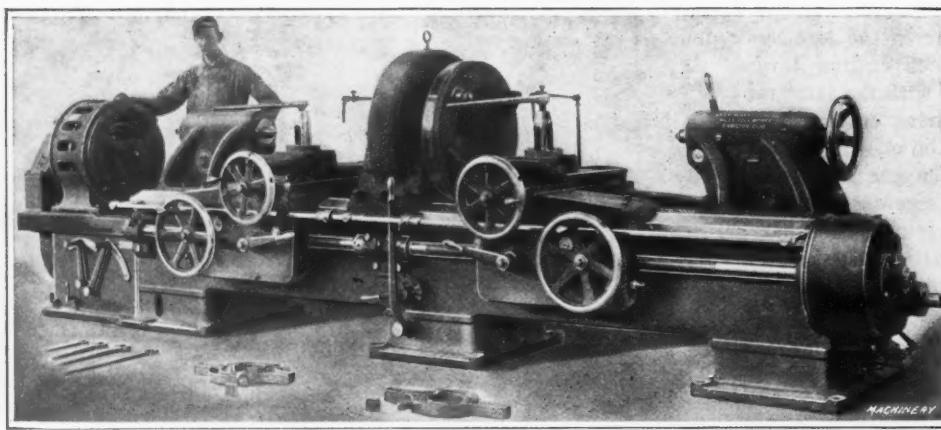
Front View of Niles-Bement-Pond No. 3 Axle Lathe
